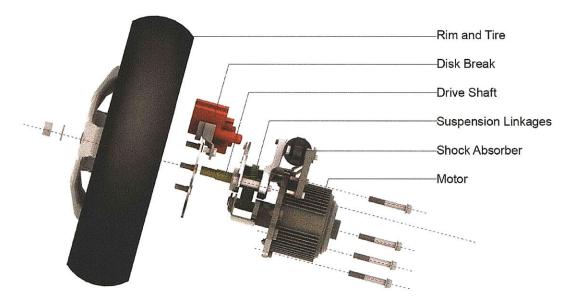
, exploded diagram of the RoboScooter Robot Wheel
